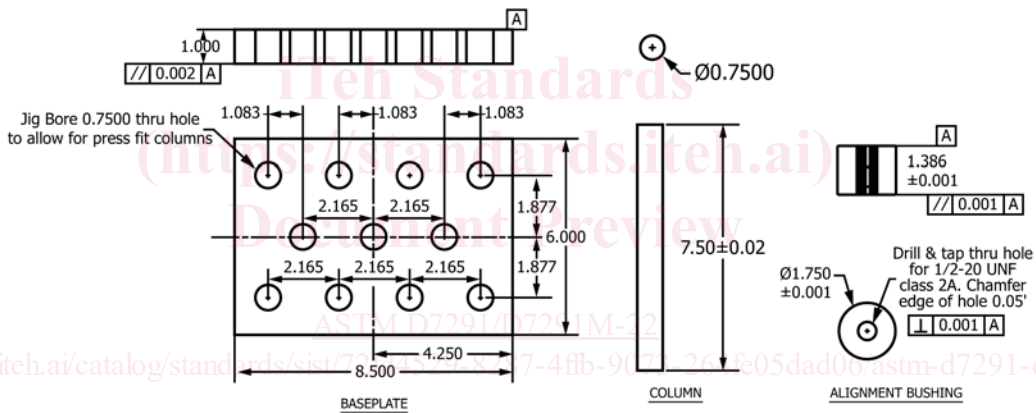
Drawing of Alignment and Bonding Fixture (inch-pound units)
